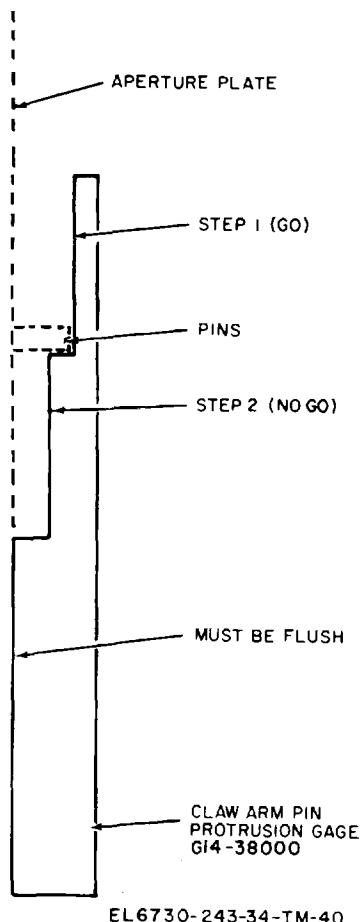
Measuring claw arm pin protrusion with claw arm pin protrusion gage GL4-38000.
